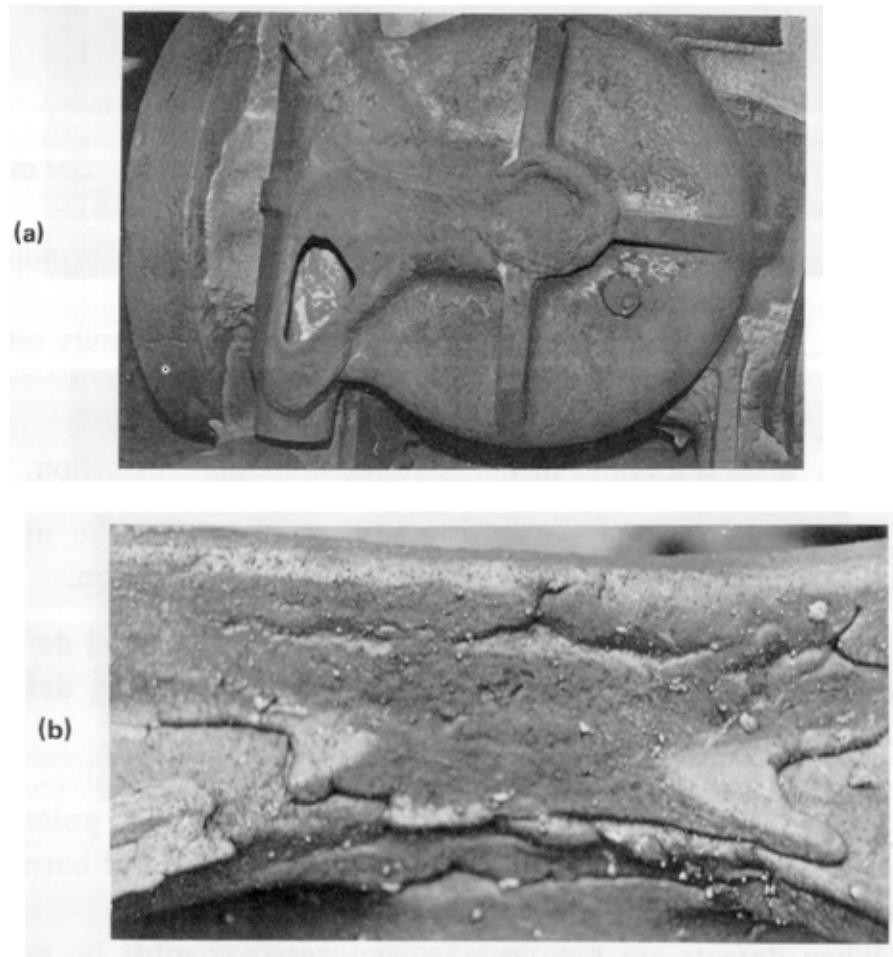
Incomplete castings: (a) a short pour; (b) a run out.
